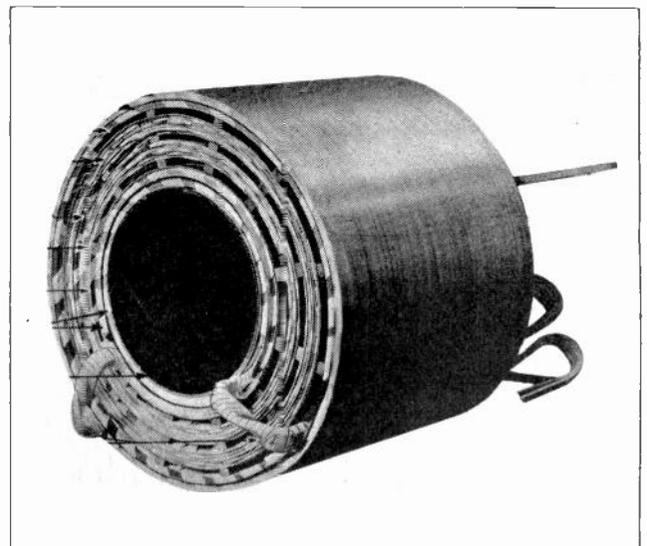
This view shows a transformer winding which is built up in layers that are spaced apart with wood strips to allow circulation of cooling oil through the winding. (Photo Courtesy General Electric Co.)
